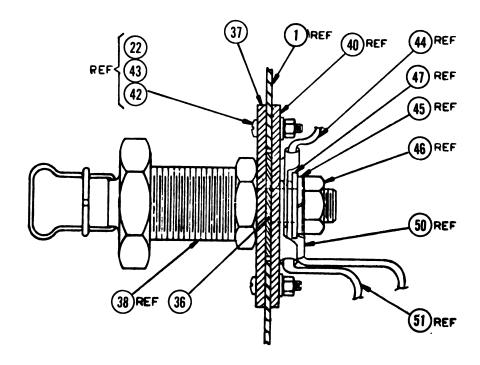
Switchbox Assembly (Sheet 7 of 7)
